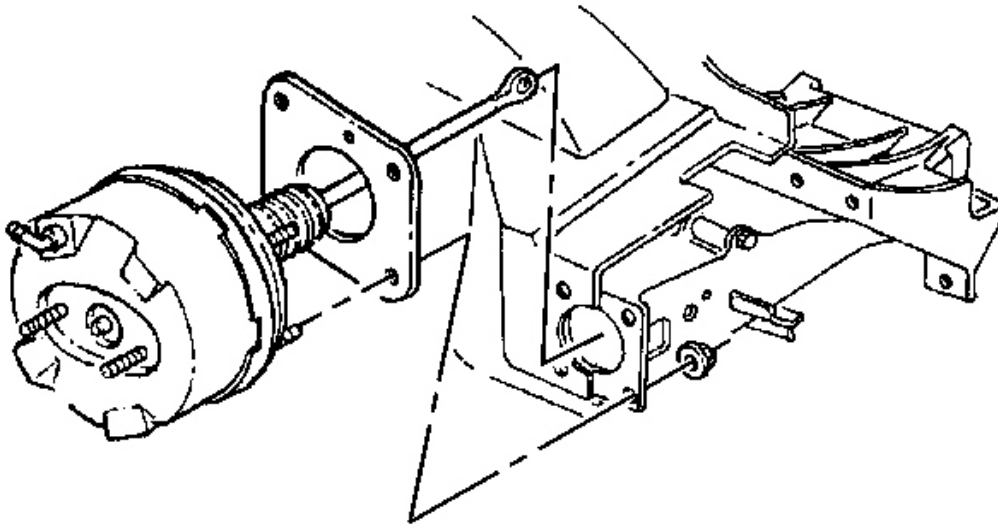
Brake Booster Mounting Nuts & Washers To Booster Studs
